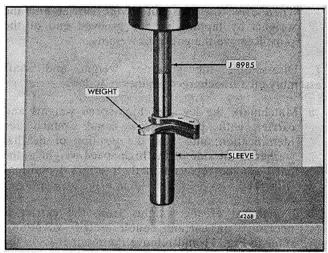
Removing governor Weight Bearings using Tool J 8985
